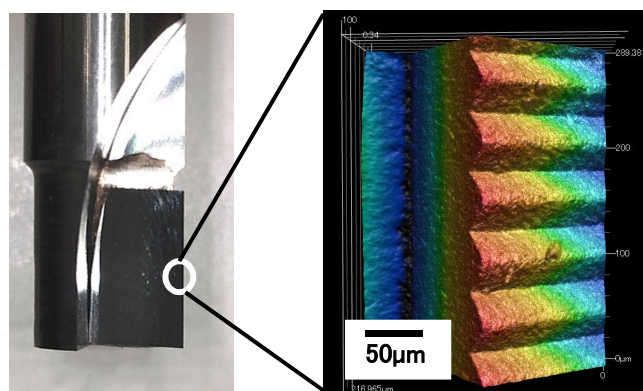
Structured PCD end mill (Diameter $\phi 6\text{mm}$) formed by laser processing.
